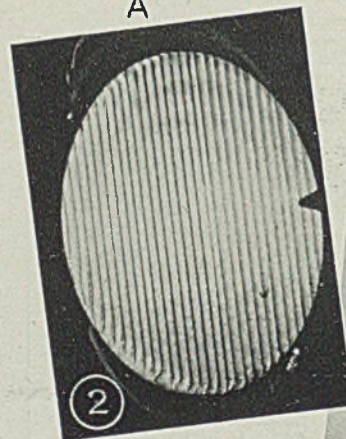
Magnaflux transfer print on cellulose tape showing surface fractures in ground gear tooth
